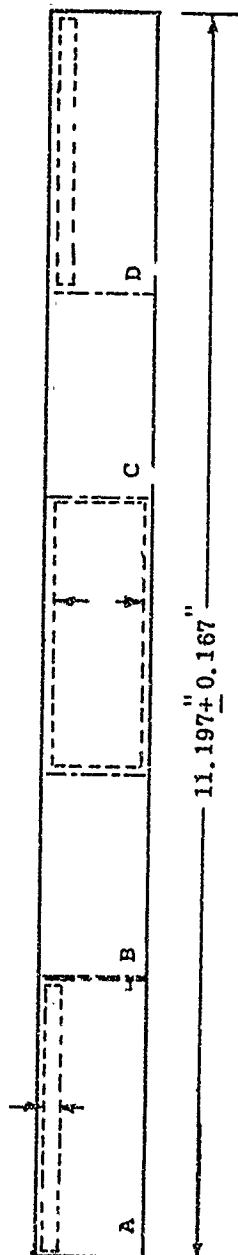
Configuration of Specimen Blank 3A10-087 as Received from Coors and Cutting Plan for Removing Phase I Macro Tensile and Macro Flexural Specimens
